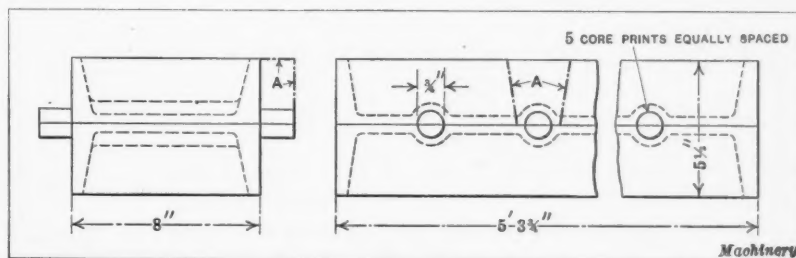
Drawing of Pattern provided for molding an I-shaped Casting having Five Cored Holes
